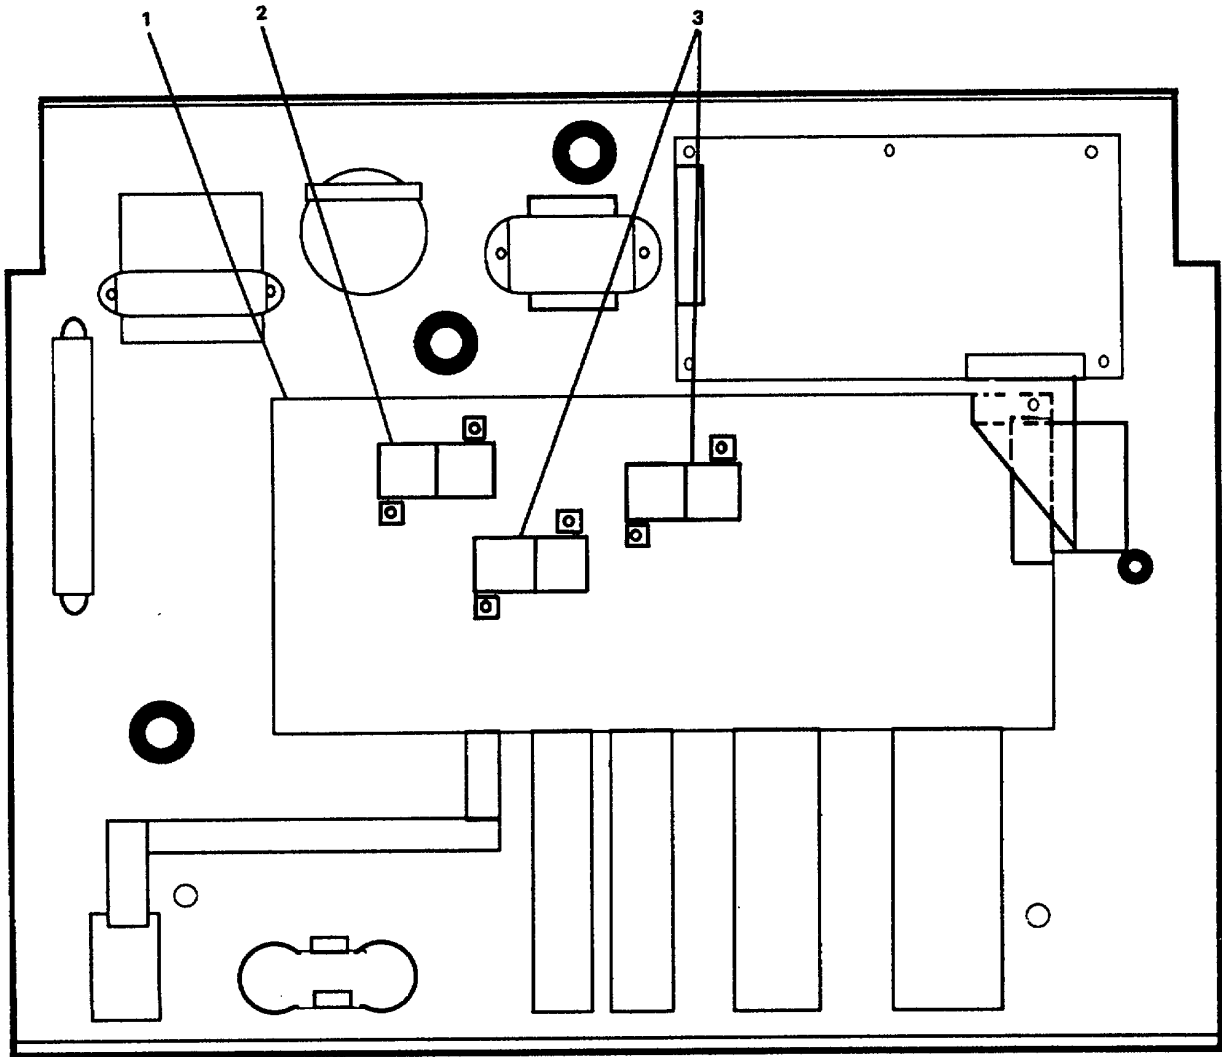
Replace/Repair Interface Printed Circuit Board.
